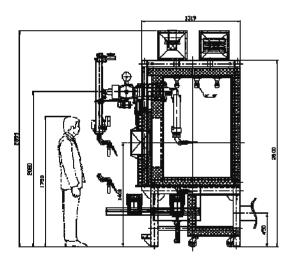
Drawing of the Hot Cell for TR23 and TR103.
